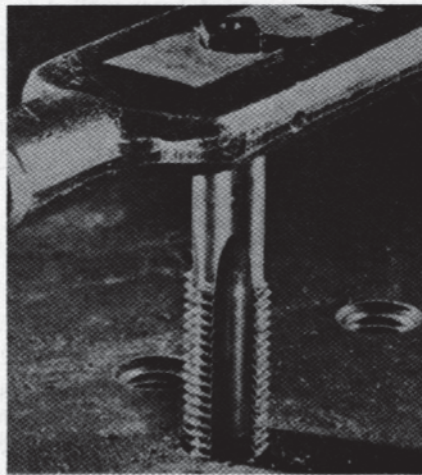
Special drill taps are provided in thread repair kit for threading drilled hole to correct size for outside of thread insert. A standard tap cannot be used.
